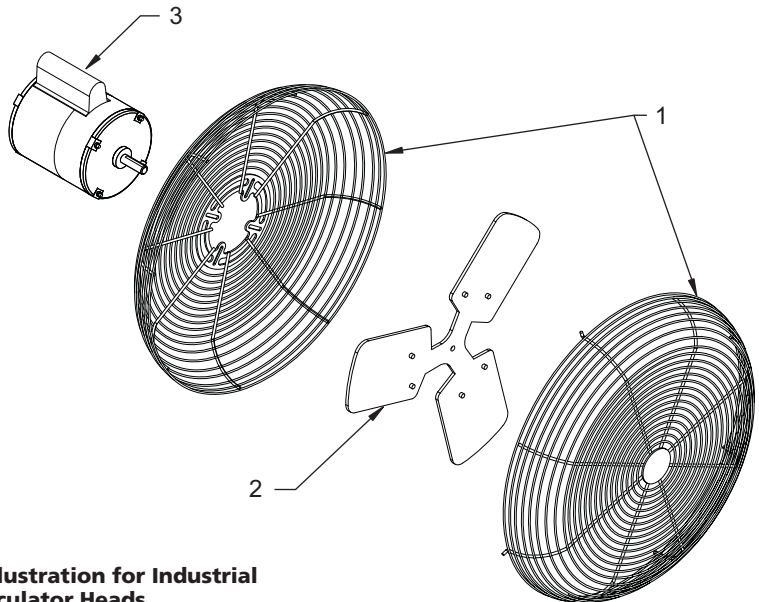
Repair Parts Illustration for Industrial Assembled Yellow Air Circulator Heads
